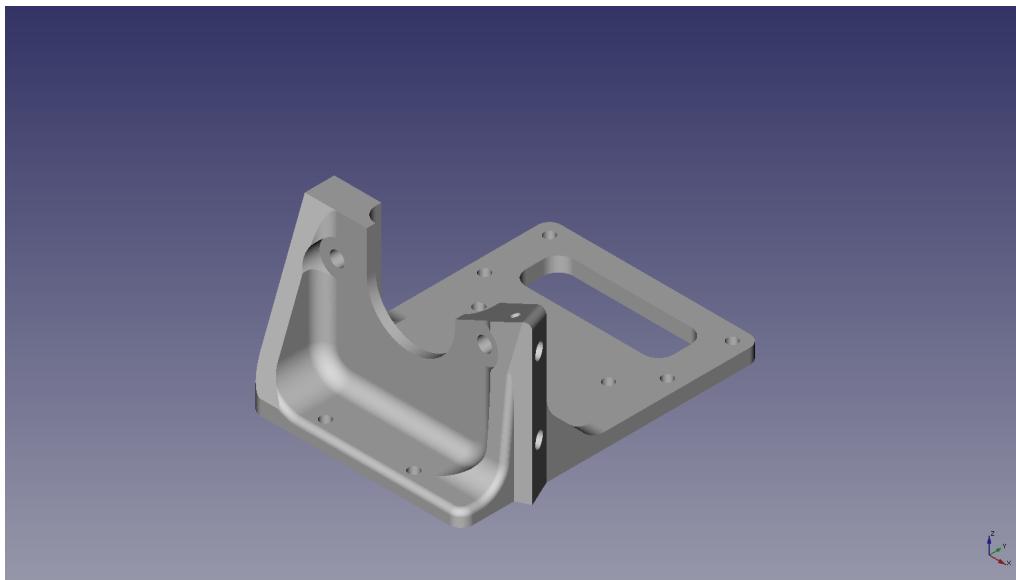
Begonia 3D Printed Extruder Mount Render
